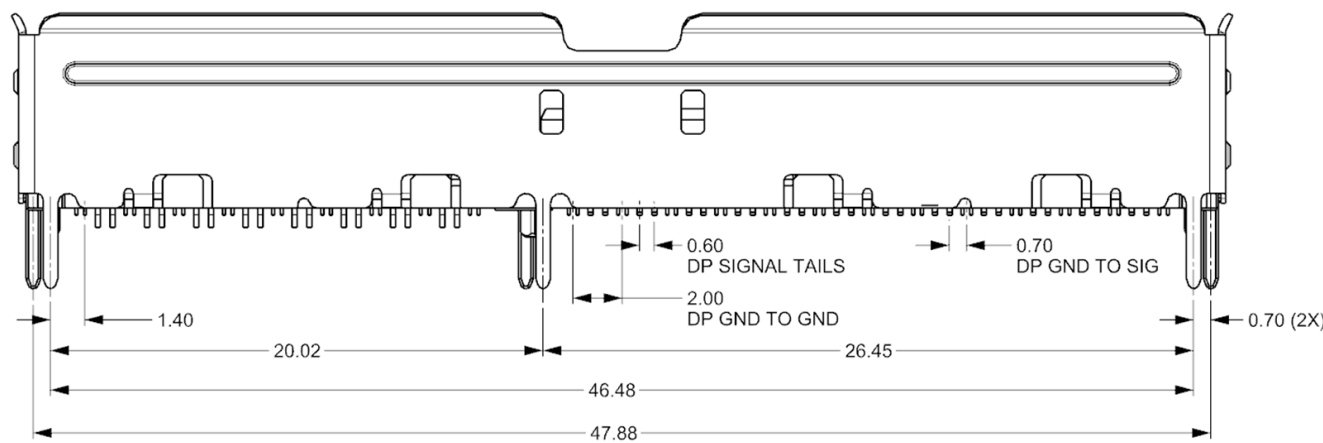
124-Pin Back View of Fixed-Side Connector Cage
